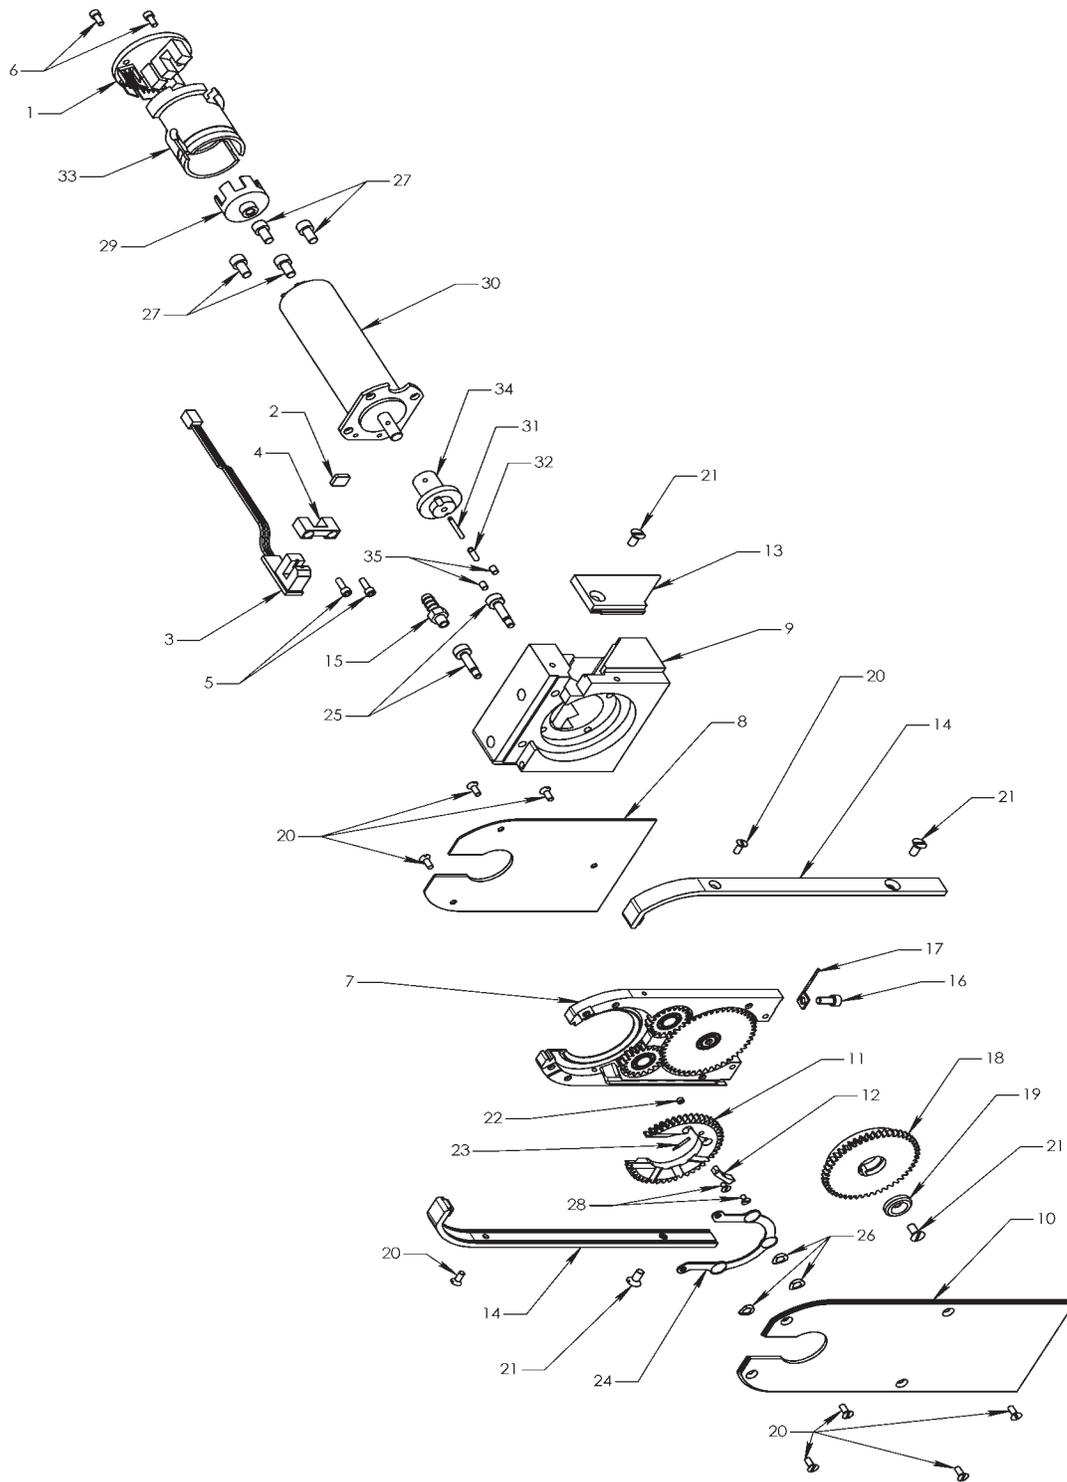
SWS-8HPH Weld Head Assembly
